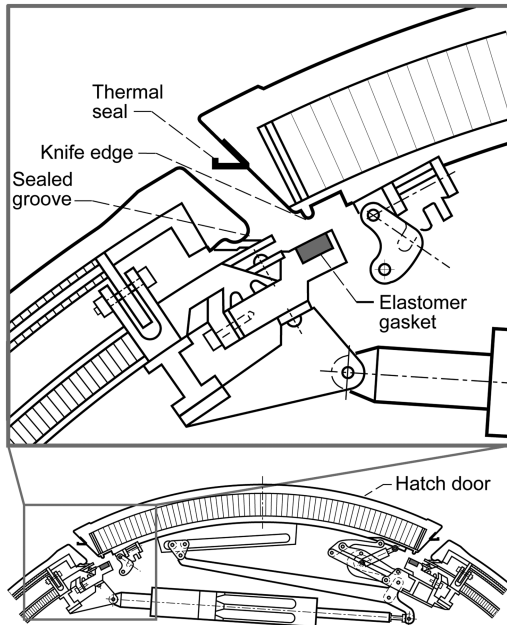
Schematic drawing (top view) of the Apollo unified crew hatch (Fig. 6 in [19]).
